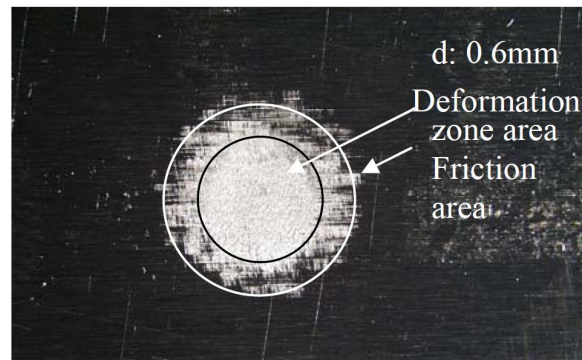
Fracture interface of Al 6061 parts by UW after peel apart.
